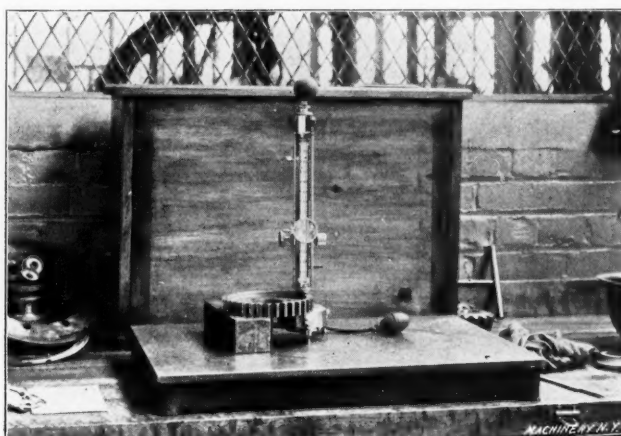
Testing the Hardness of a Gear with a Scleroscope
